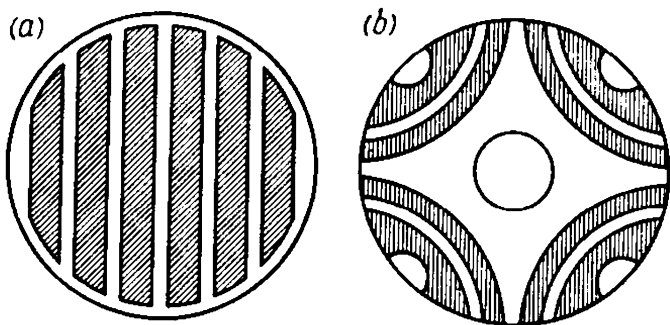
Designs of a reaction synchronous machine rotor with:
